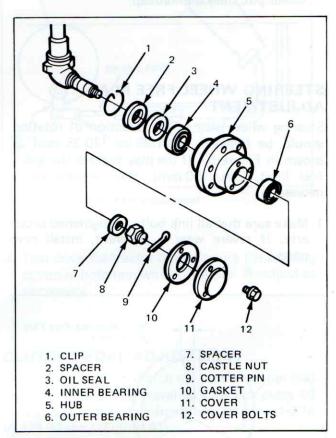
Servicing Front Wheel Bearings — Two-Wheel Drive
